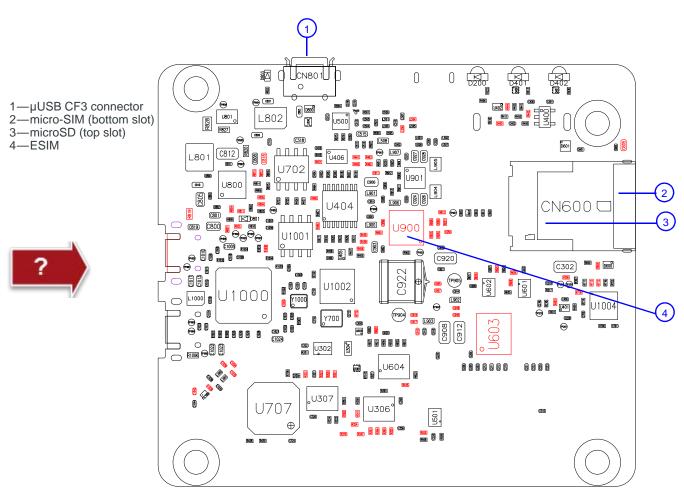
mangOH Red Assembly - Bottom Side Switches/Connectors
